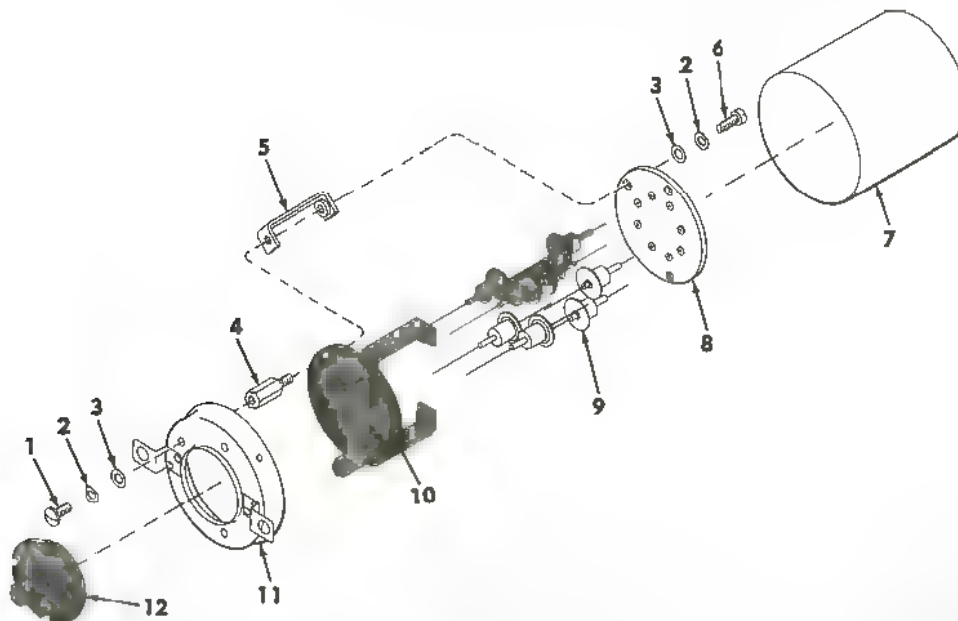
CONTROL, POWER SUPPLY /9159969/-PARTIAL EXPLODED VIEW
